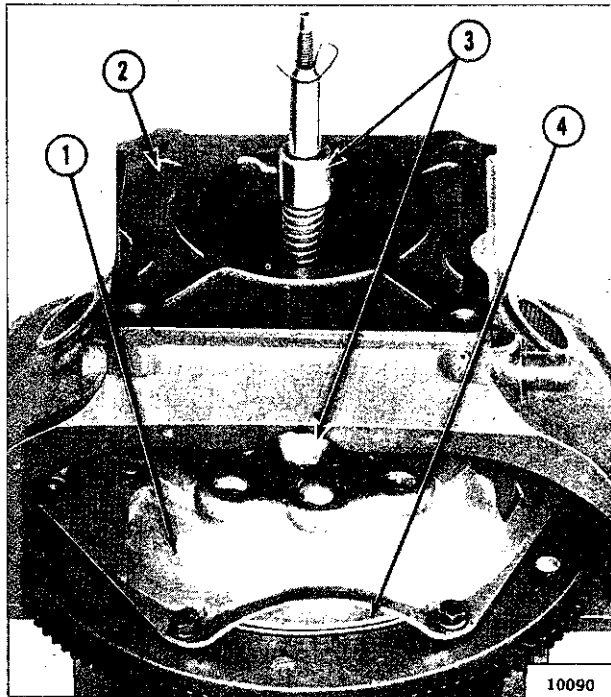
INSTALLING CLUTCH ON FLYWHEEL
